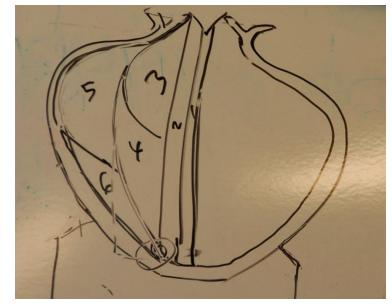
shows the general sequence used in removing the waste from inside the vessel. Area 1 is removed using the depth drill. Using the straight tool, area 2 is removed making a hole the width of the vessel opening to the bottom of the depth hole. The tool action is a gentle sweeping action moving from the side of the cut to the center hole and back again. This sweeping action allows monitoring the depth of the hollowing via the depth hole.
